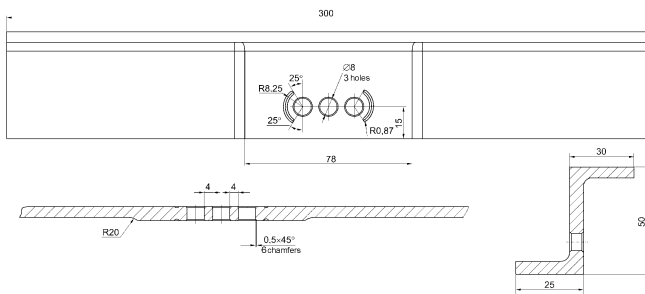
Stringer with Three Holes of  $\varnothing 8$  mm (distance between center of holes – 12 mm), Processed in Holes Area by Stamping Craters of Segment Shape Test-Piece
